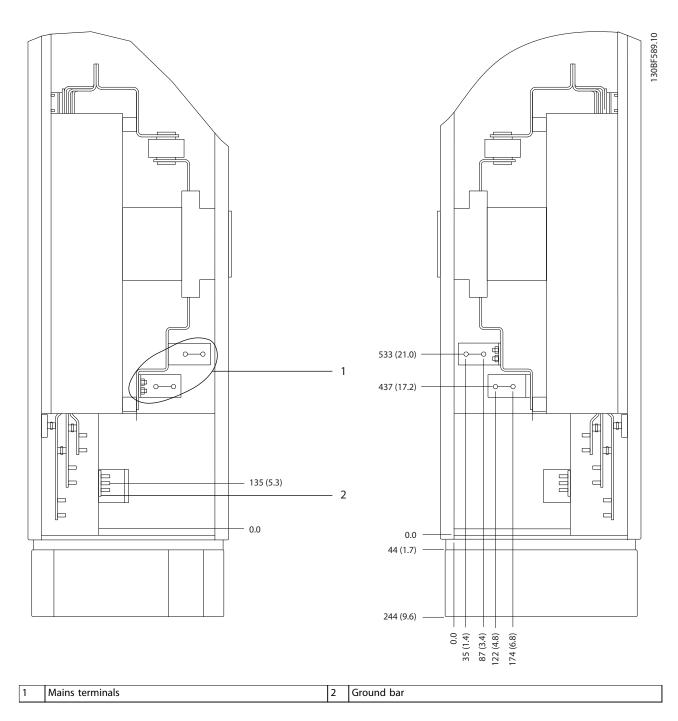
Terminal Dimensions for F3–F4 Options Cabinet with Circuit Breaker/Molded Case Switch (380–480/500 V Models: P450; 525–690 V Models: P630–P710), Side View
